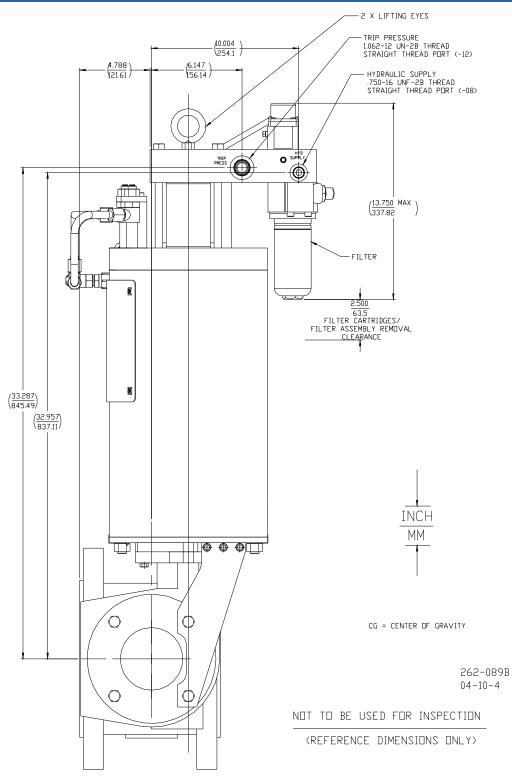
Gas Stop/Ratio Valve Outline Drawing (8-inch, with 3 LVDTs)
